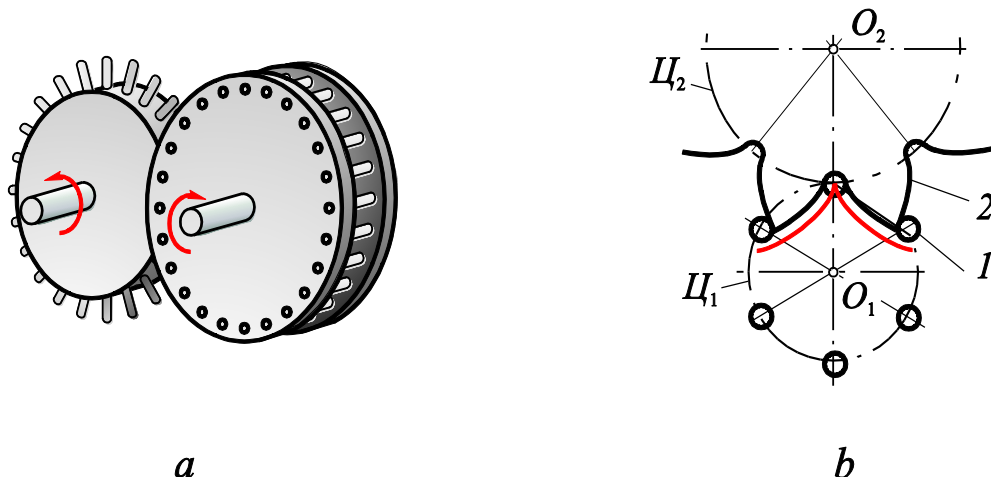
Pin gear scheme: *a* – ancient prototype; *b* – present-day pin gear
